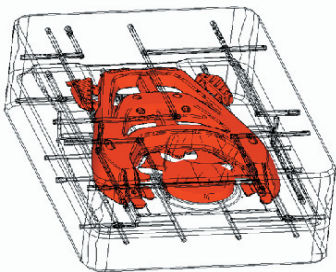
HPDC component in its mold (Courtesy of INJECTA).
